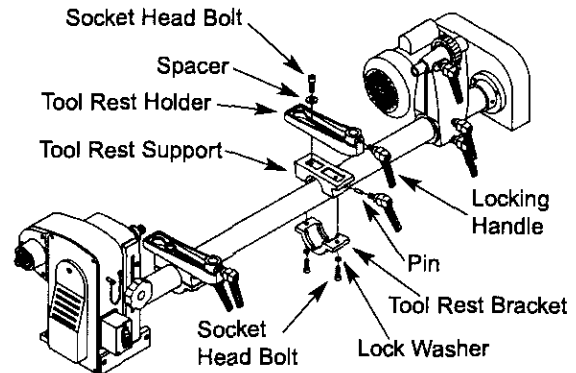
Attach Tool Rest Base to Lathe Bed (Model 24952)
